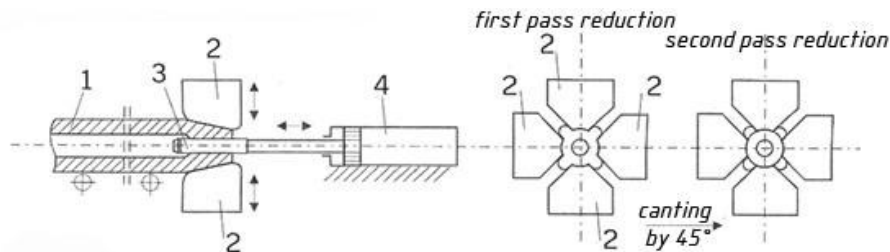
Scheme of preparation of the front end of the sleeve on a four-jaw hydraulic press: 1- sleeve, 2- press jaws, 3- mandrel, 4- mandrel hydraulic drive
